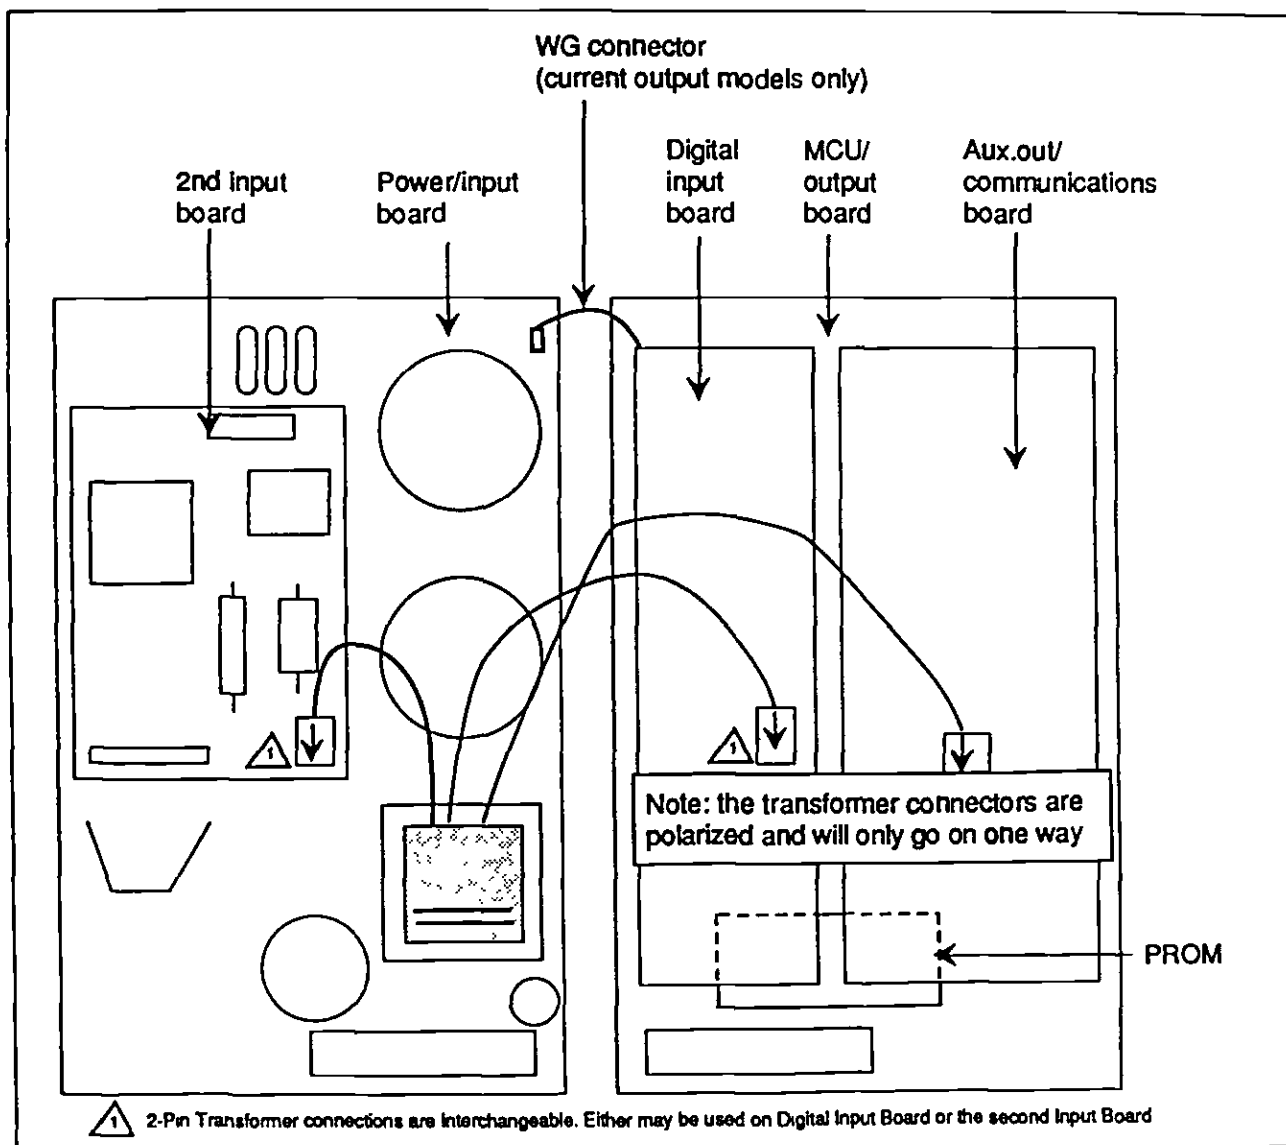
identifies each of the printed wiring boards that can be replaced. Refer to this drawing when following the replacement procedures for each of the boards, since you have to remove all of them from the chassis to replace the one you want.
